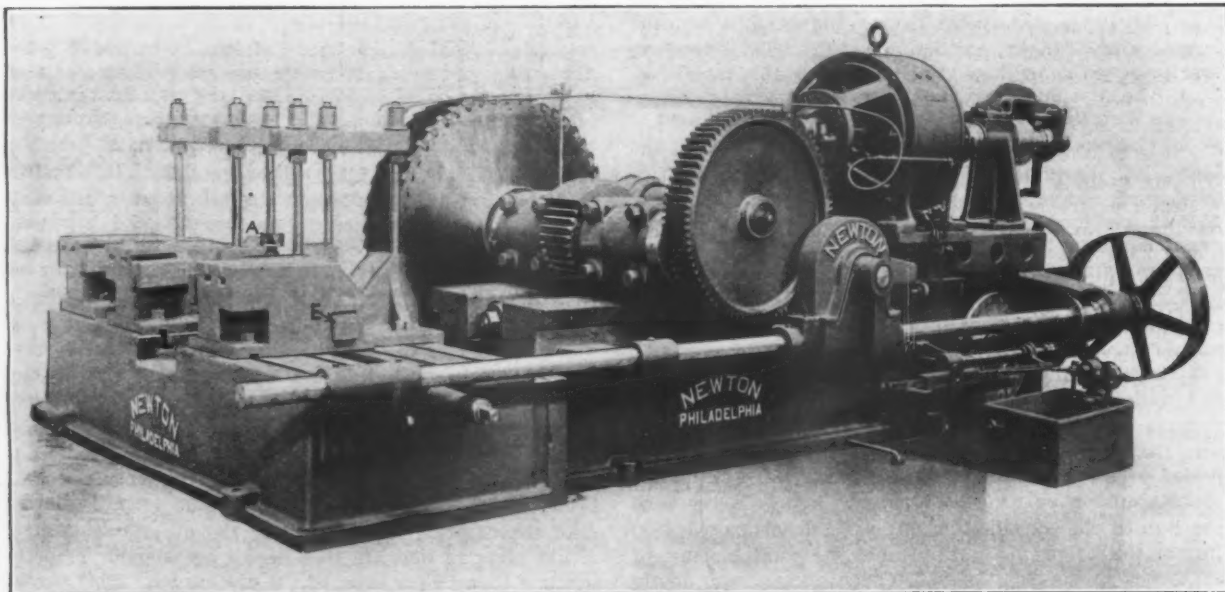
A Special Crank Shaft Cold Saw Cutting-Off Machine Built by the Newton Machine Tool Works, Philadelphia, Pa.
